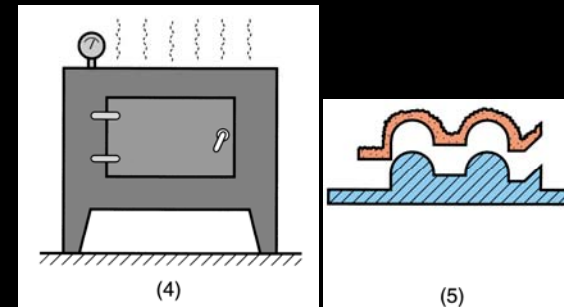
Steps in shell-molding: (4) sand shell is heated in oven for several minutes to complete curing (5) shell mold is stripped from the pattern
